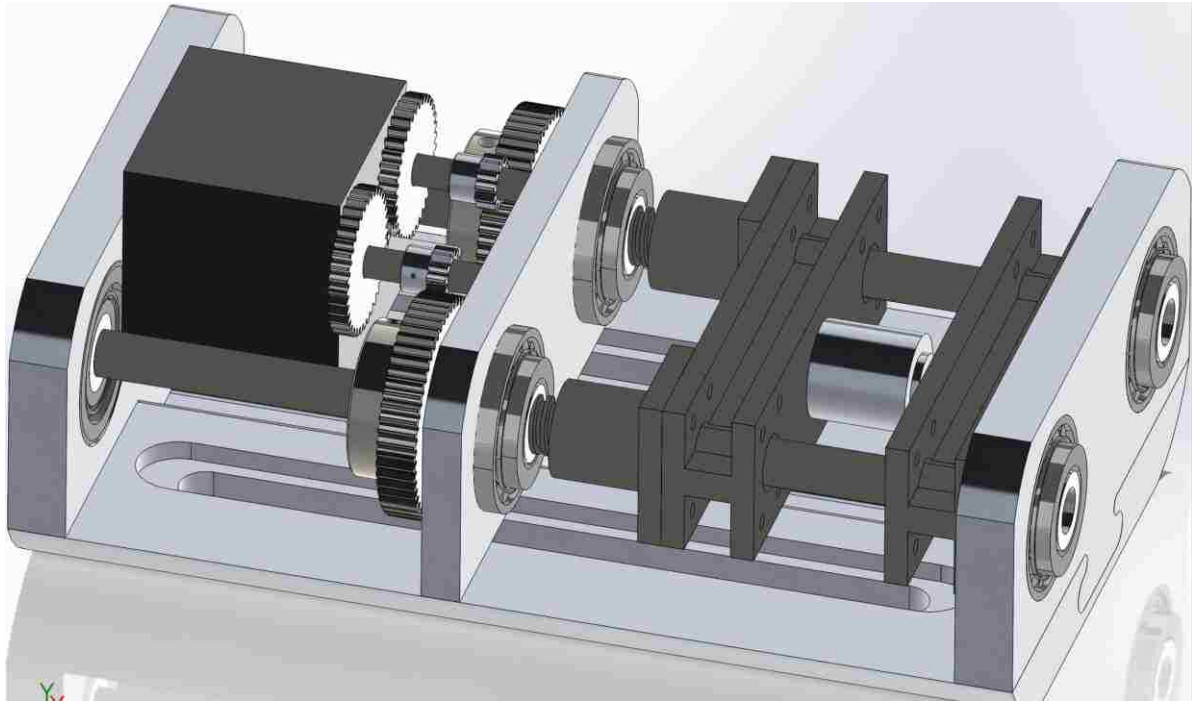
Second design of the compression stage which will be a basis of the redesign.
